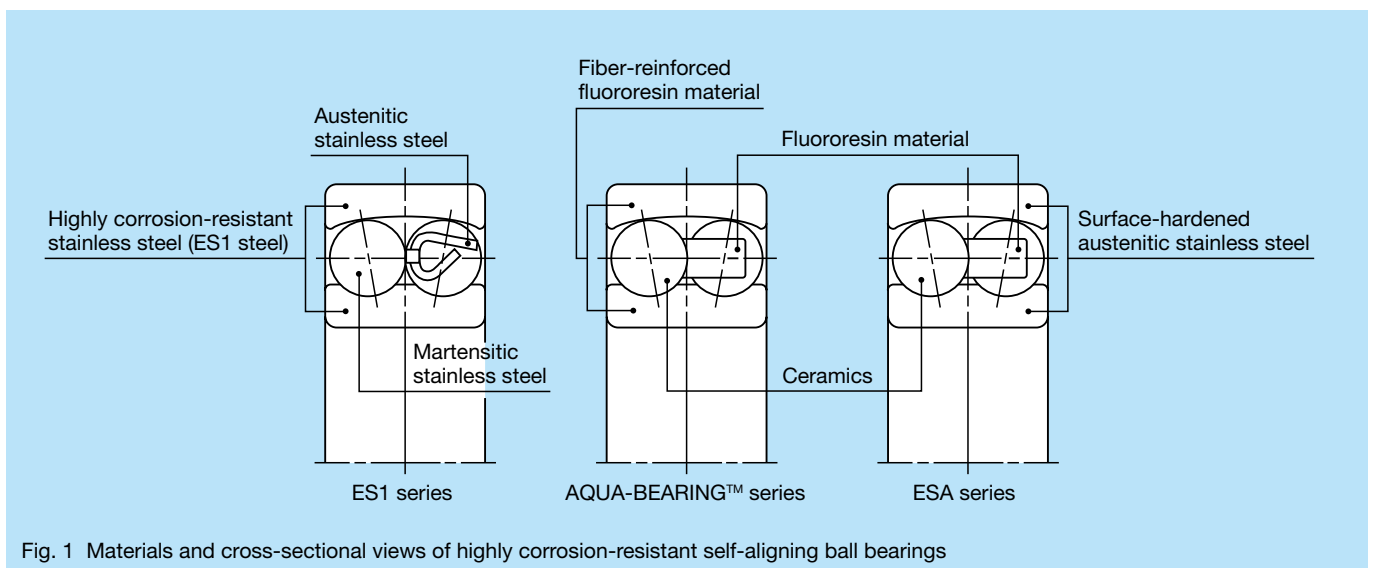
Materials and cross-sectional views of highly corrosion-resistant self-aligning ball bearings
